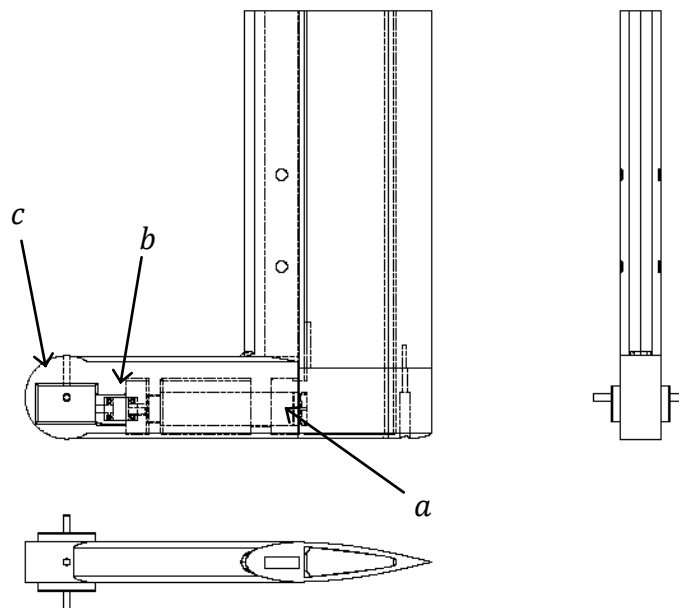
CDCC with Gearbox Counterbore. The width of the gearbox necessitated a counterbore of the models.
